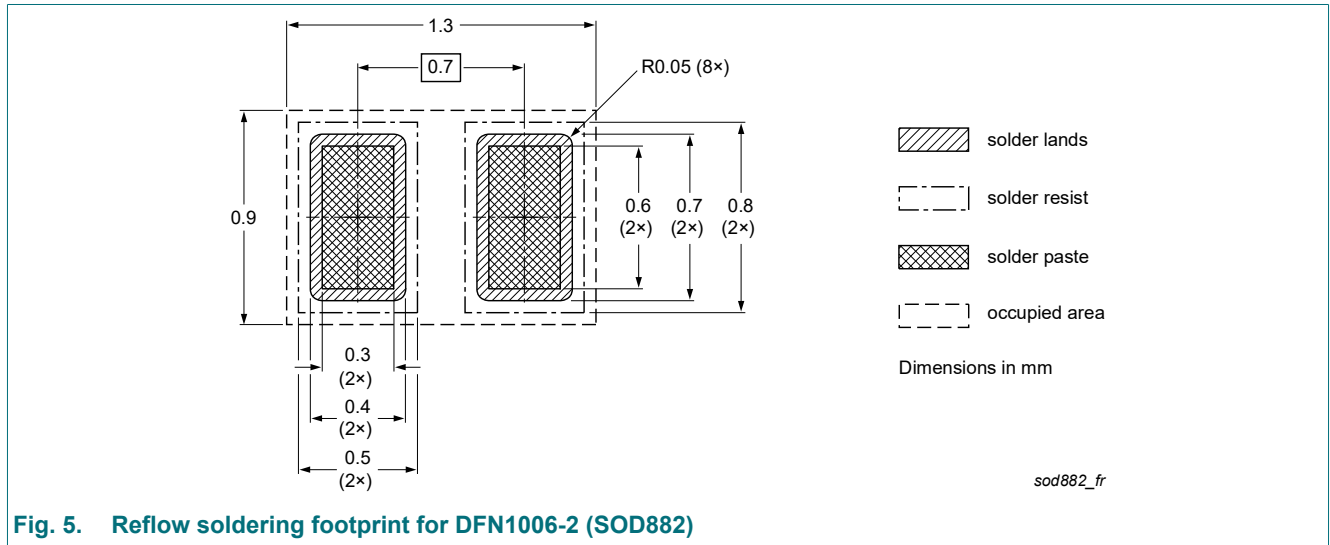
Reflow soldering footprint for DFN1006-2 (SOD882)
